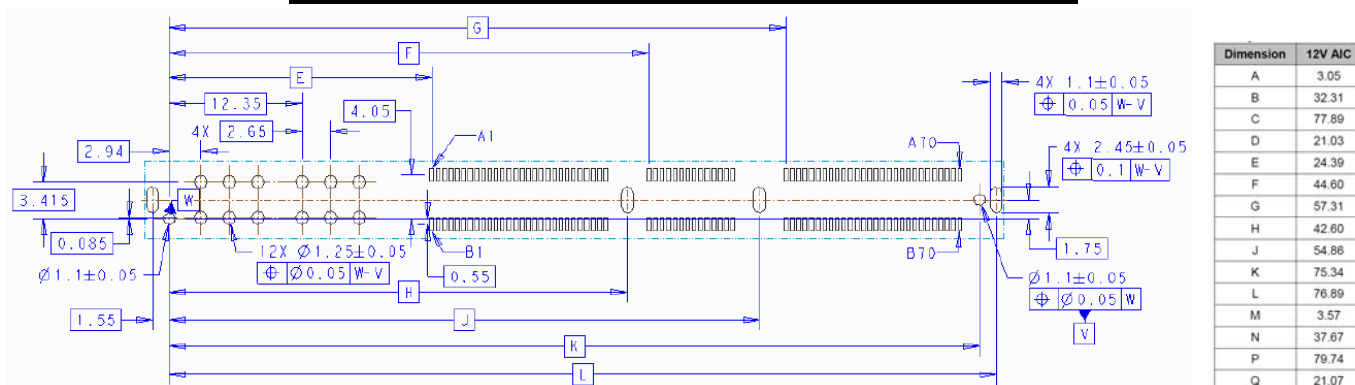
PCB Layout for GenZ VT 4C HP 12V Unshielded
